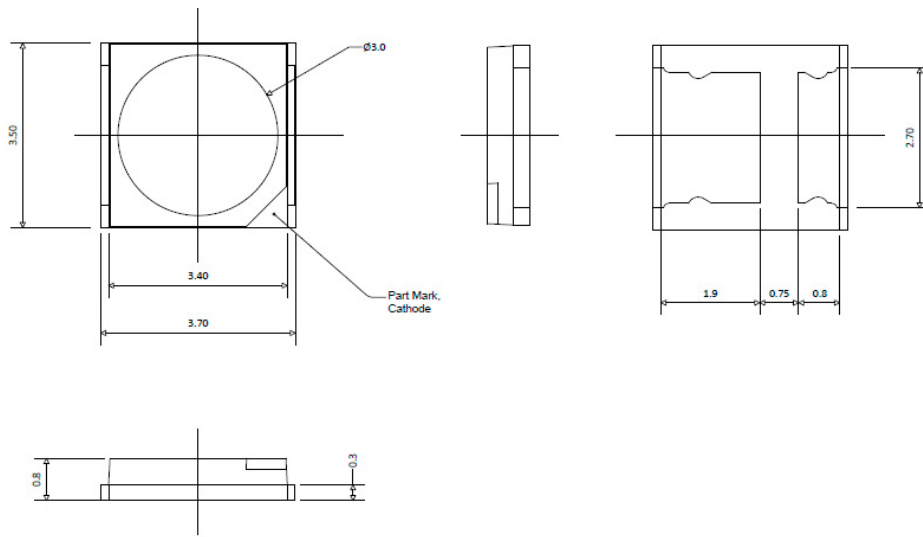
Mechanical dimensions for LUXEON 3535L with CrispColor Technology.
